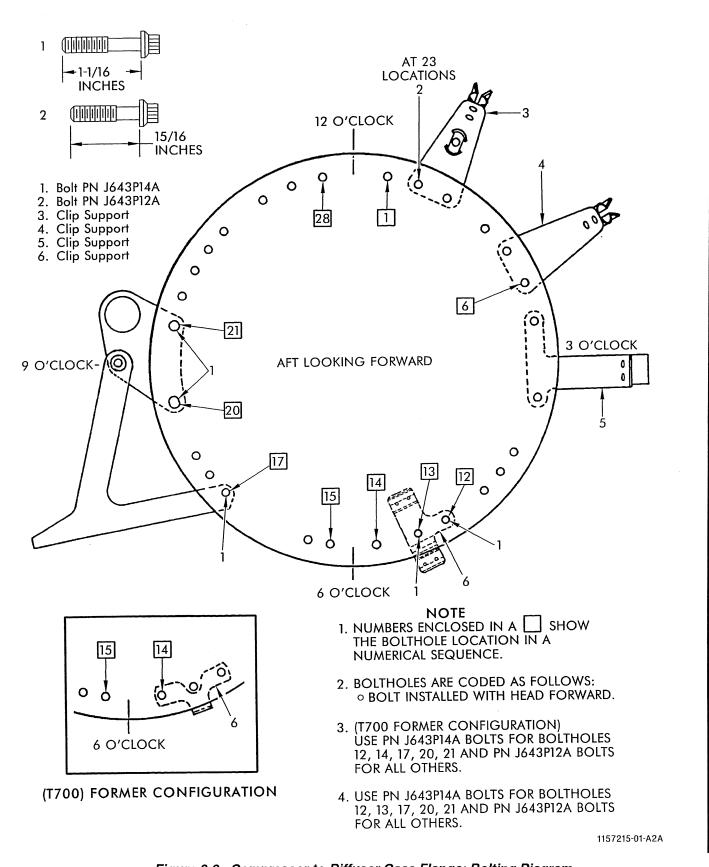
Compressor-to-Diffuser Case Flange; Bolting Diagram
